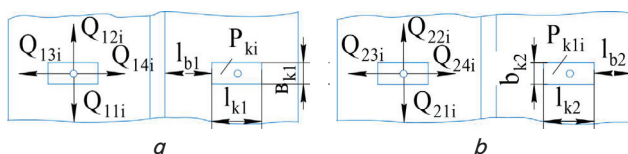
Sweeps of the bearing’s outer and inner work surfaces: a – the outer surface of the bearing; b – the inner surface of the bearing
